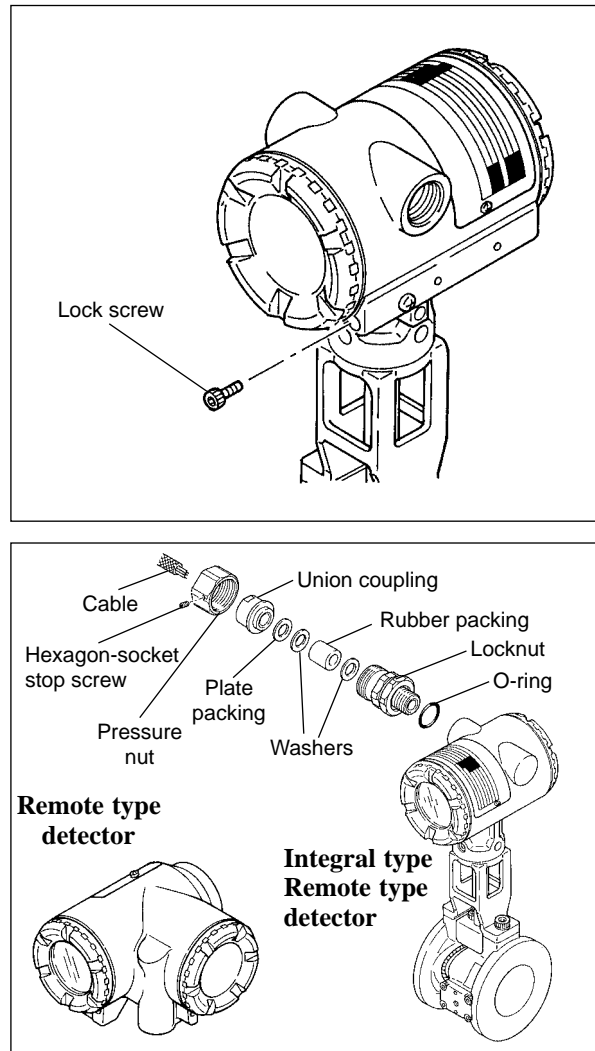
Attachment of Flameproof Packing Adapter
